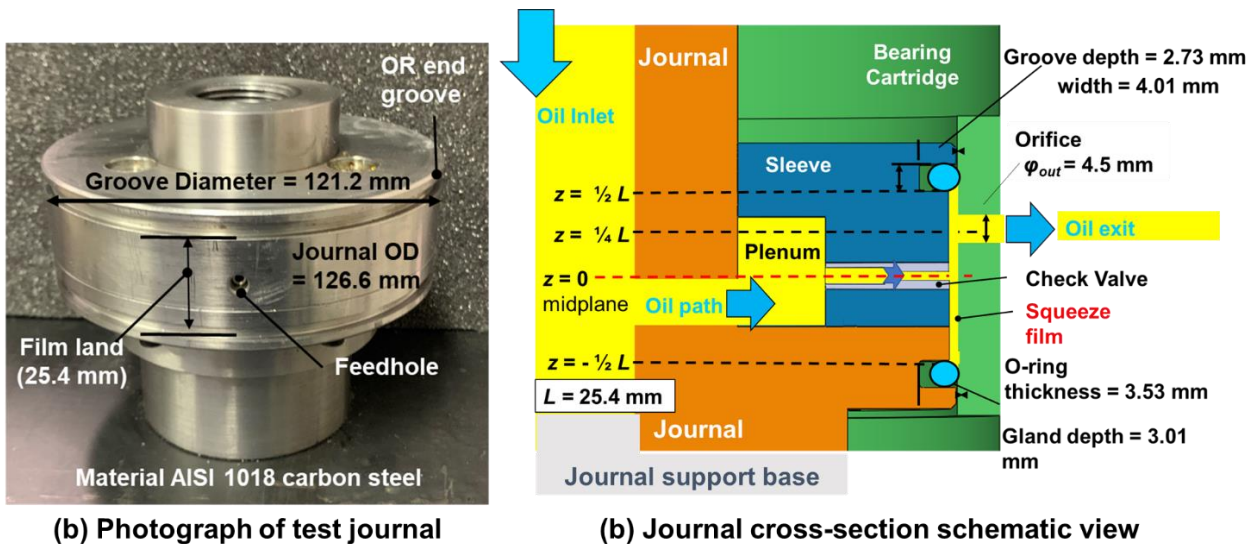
(a) Photograph of test journal showcasing end grooves and a feed hole, and (b) detail of cross-section view of assembly with dimensions for grooves housing O-rings. (Drawings not to scale and with exaggerated features).
